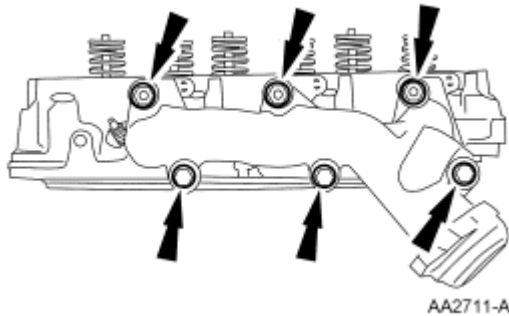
Locating Bolts, Stud Bolts & Exhaust Manifold And Gasket
